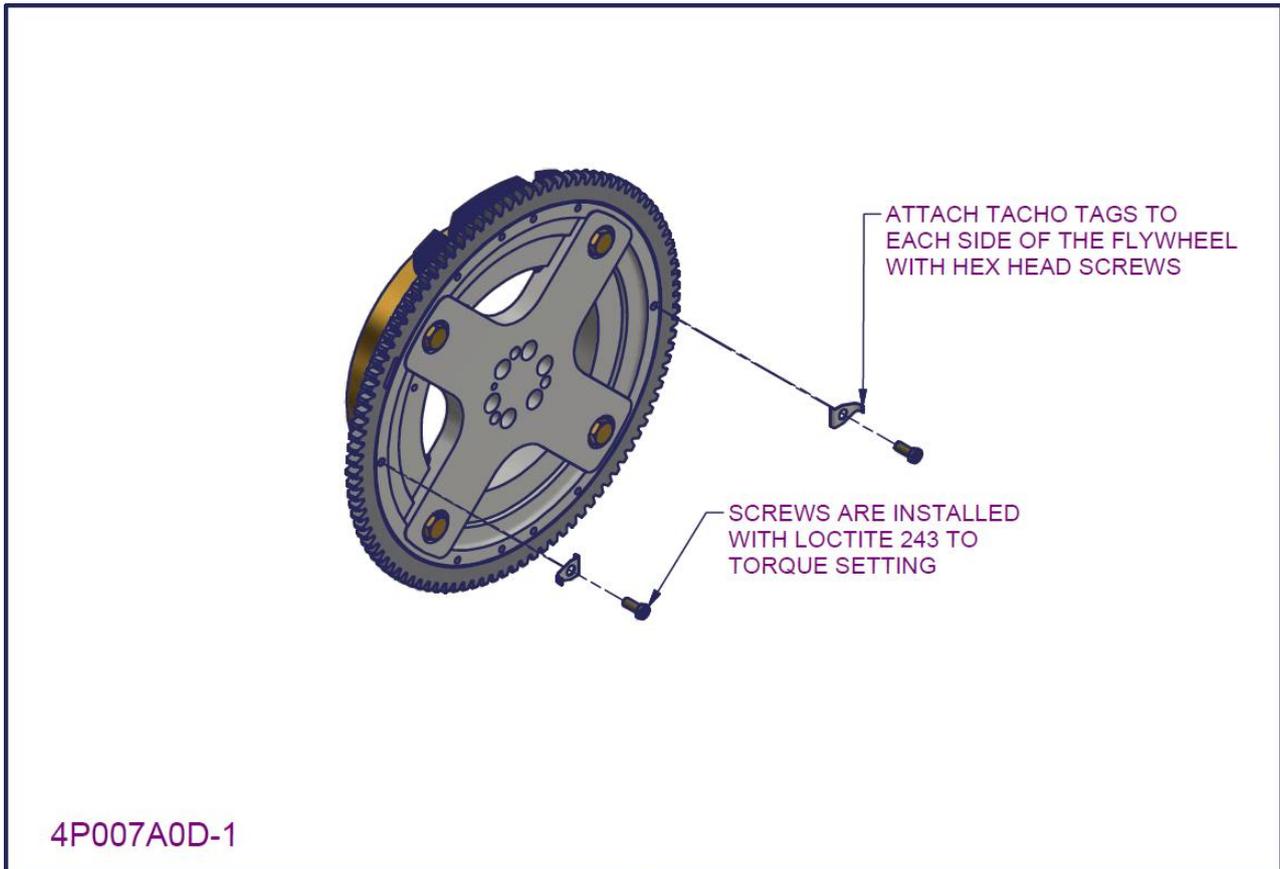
2200/3300 Flywheel subassembly (aluminium cross piece) 5
